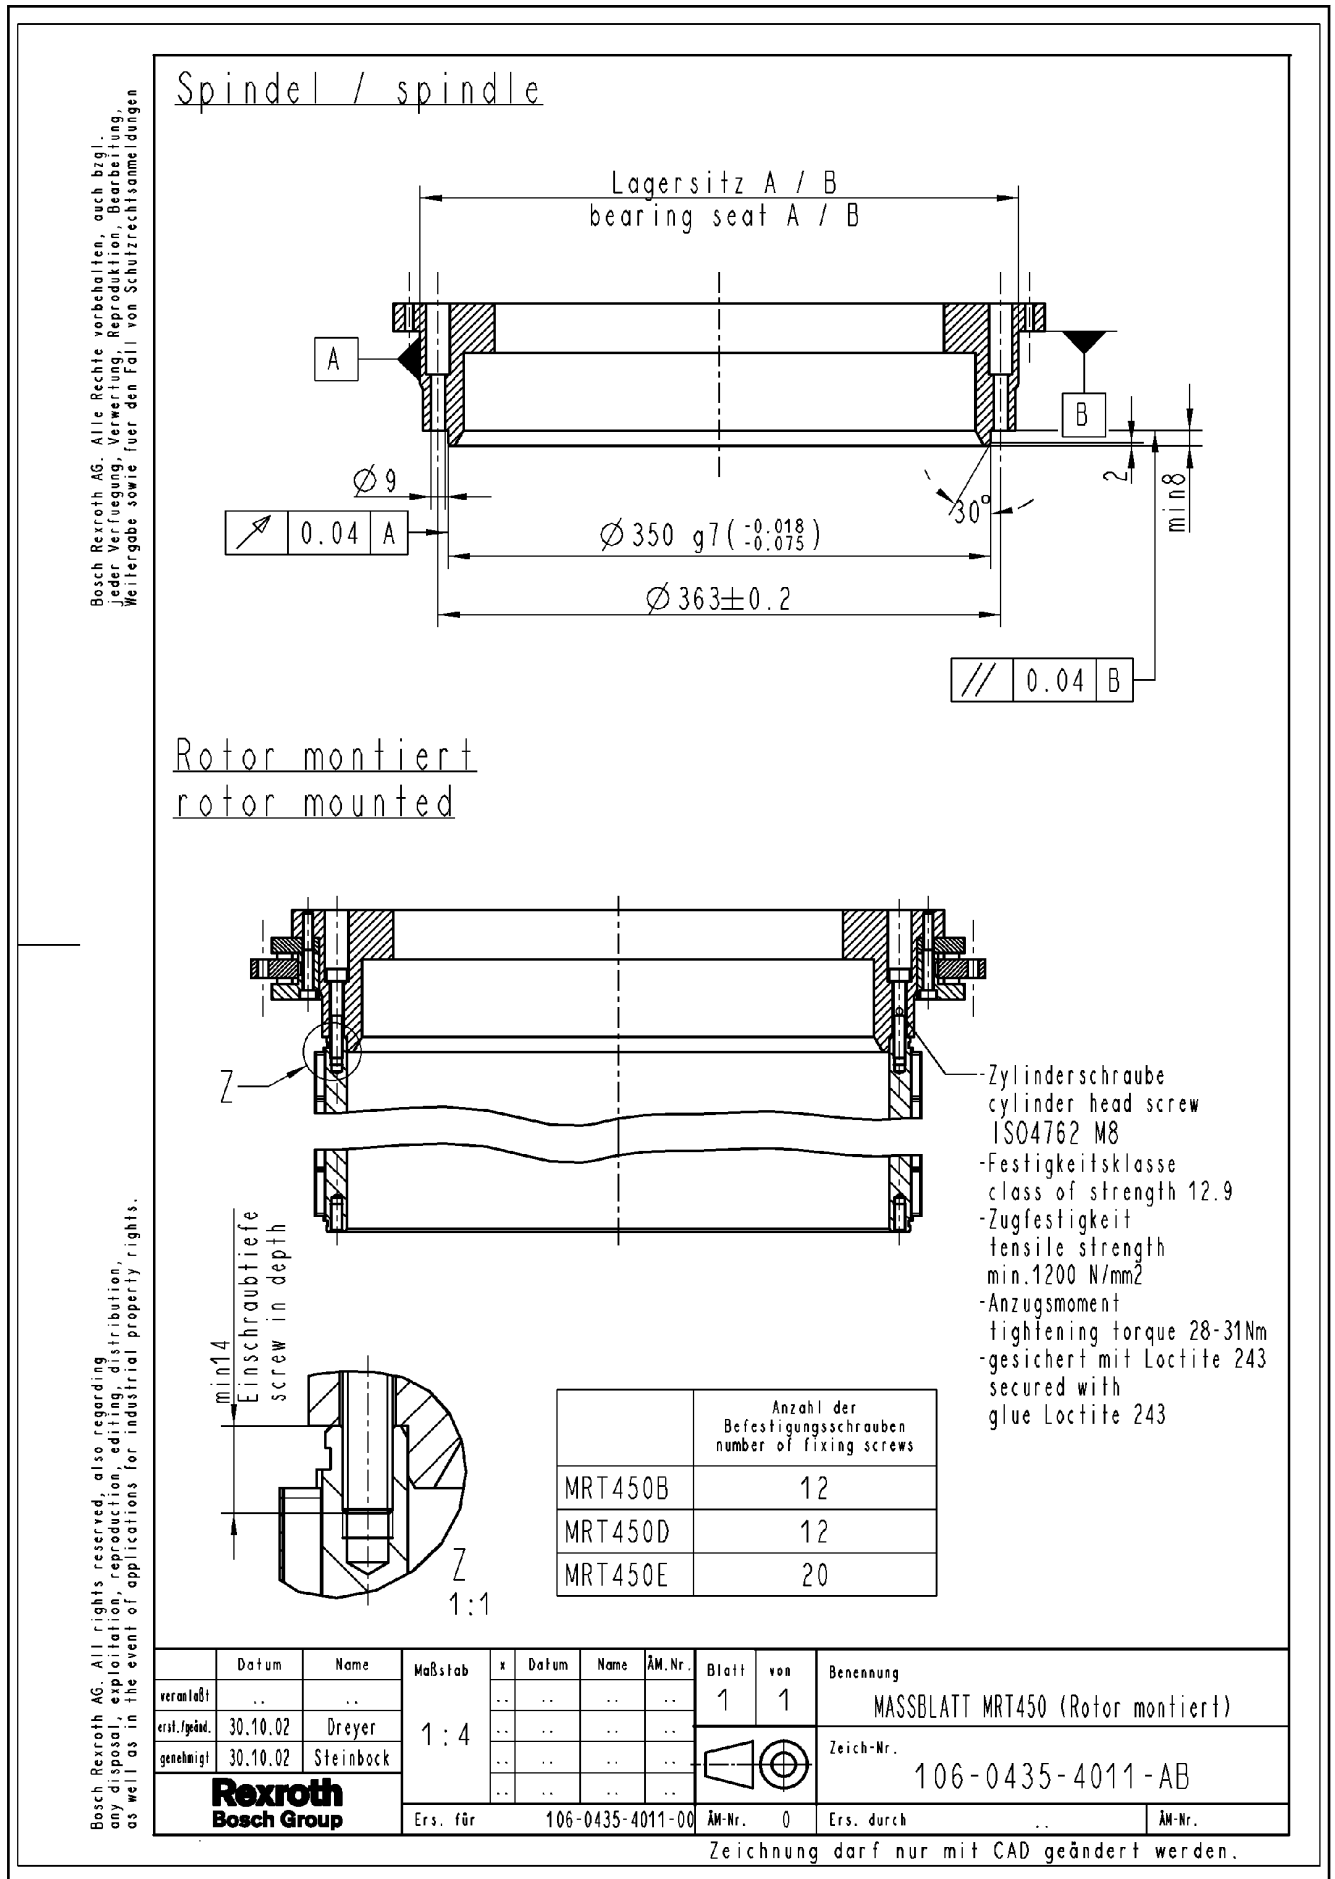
Dimension sheet for rotor MRT450, mounted
